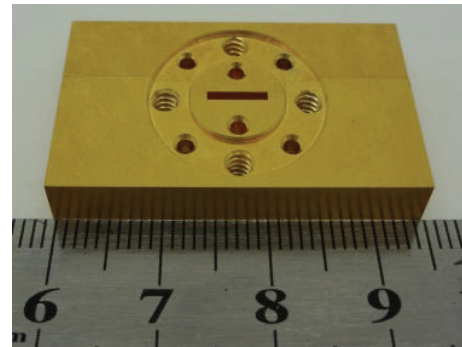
Test fixtures with the modified ring-centered flanges.
